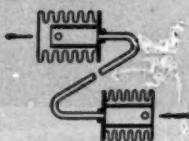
Motion Transmission—Two bellows assemblies joined by a tube for hydraulic transmission of motion or power. Motive force applied may be either thermostatic or mechanical.
